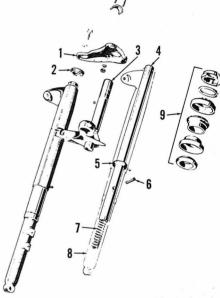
View of typical front sus-pension system used on small displacement Ducati motorcycles.
